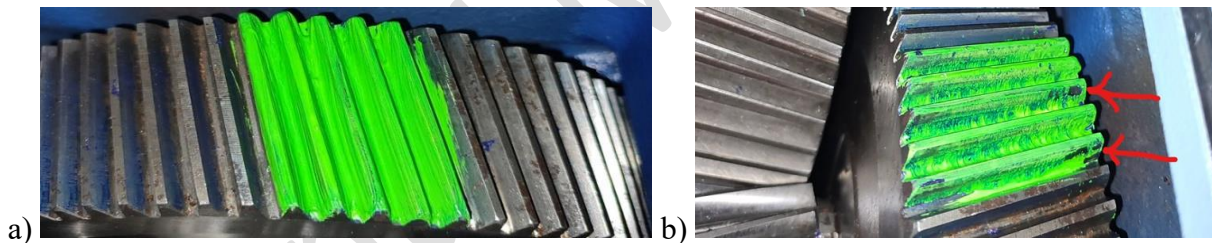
Blue check test between output and second idler shaft gears: a) Before engagement, b) After engagement
